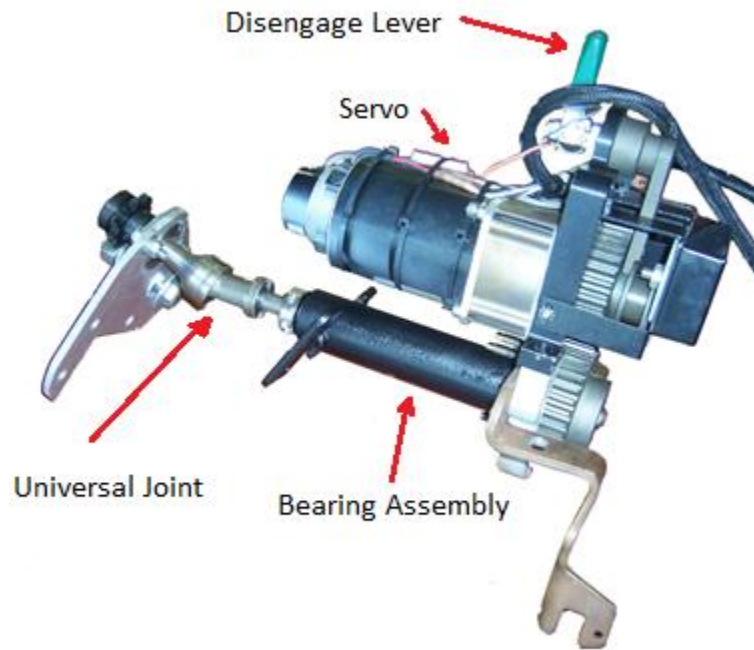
Assembled Steering Unit (courtesy of Matt Wills)
